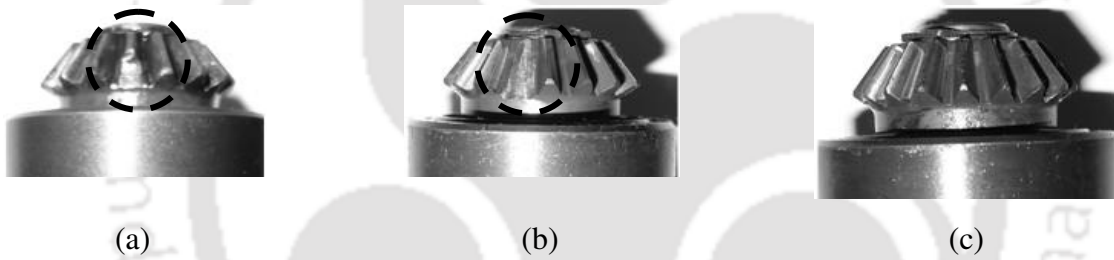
A range of of bevel gear with (a) chipped tooth, (b) missing tooth and (c) worn gear
